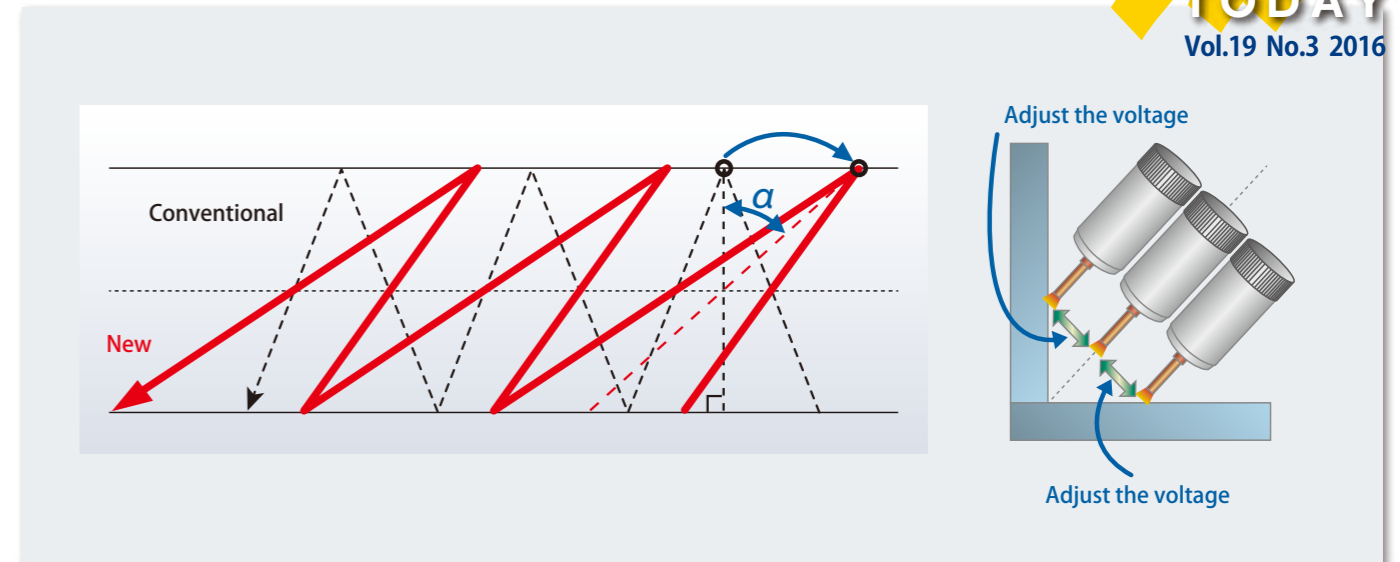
Horizontal fillet welding with high welding speed
